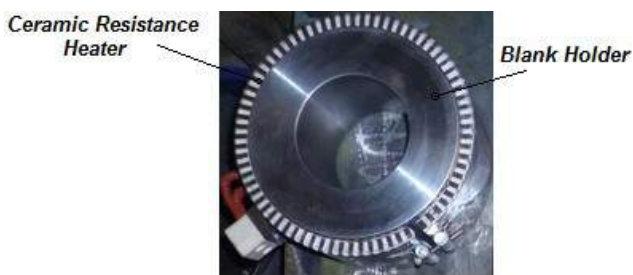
Assembly of ceramic resistance heater to the blank holder
